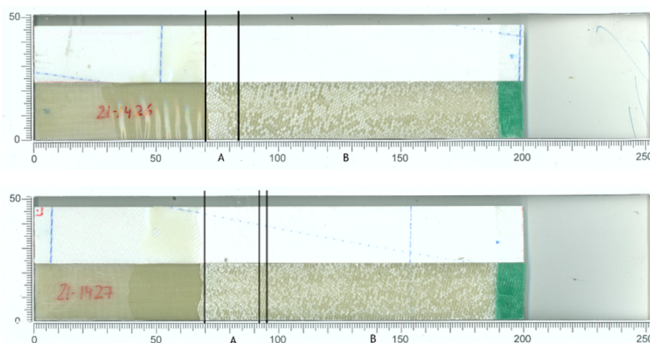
Examples of fracture surfaces of AM PC/PC ENF specimens after testing (specimen numbers 21-1426 and 21-1427).
